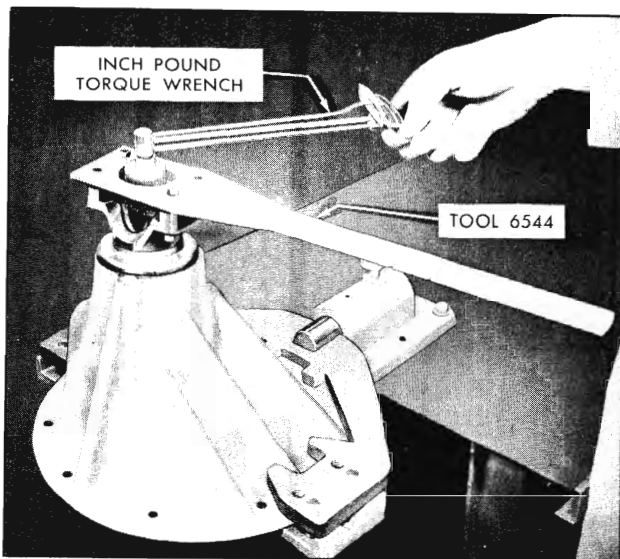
Measuring Bearing Preload With Torque Wrench
